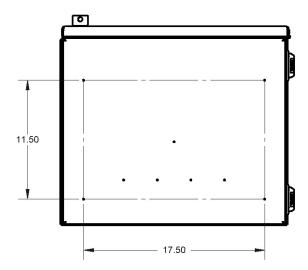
Enclosure/Plinth Mounting Hole Locations
